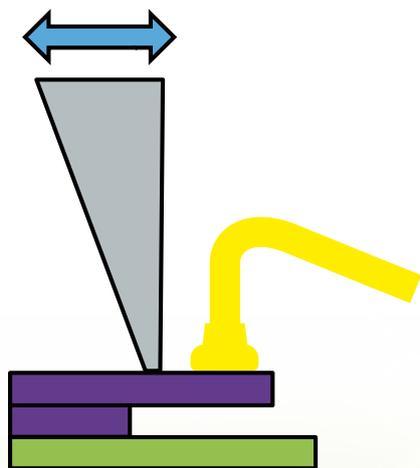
Shear tool being slowly raised until oscillating force is reduced to zero
